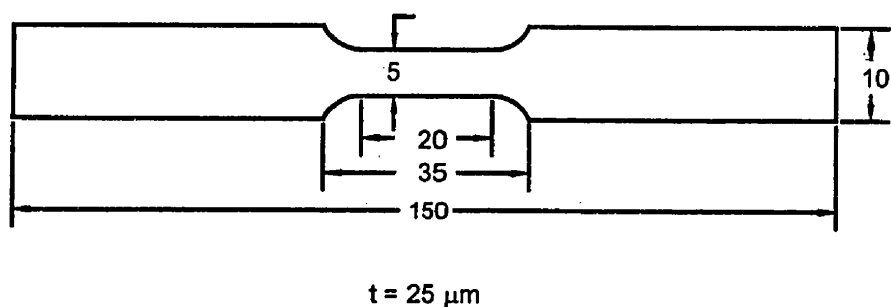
Dimensions of 316 stainless steel tensile ribbon specimens.
